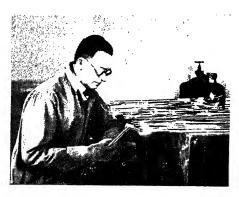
Welding rod quality is constantly checked by flame test.
